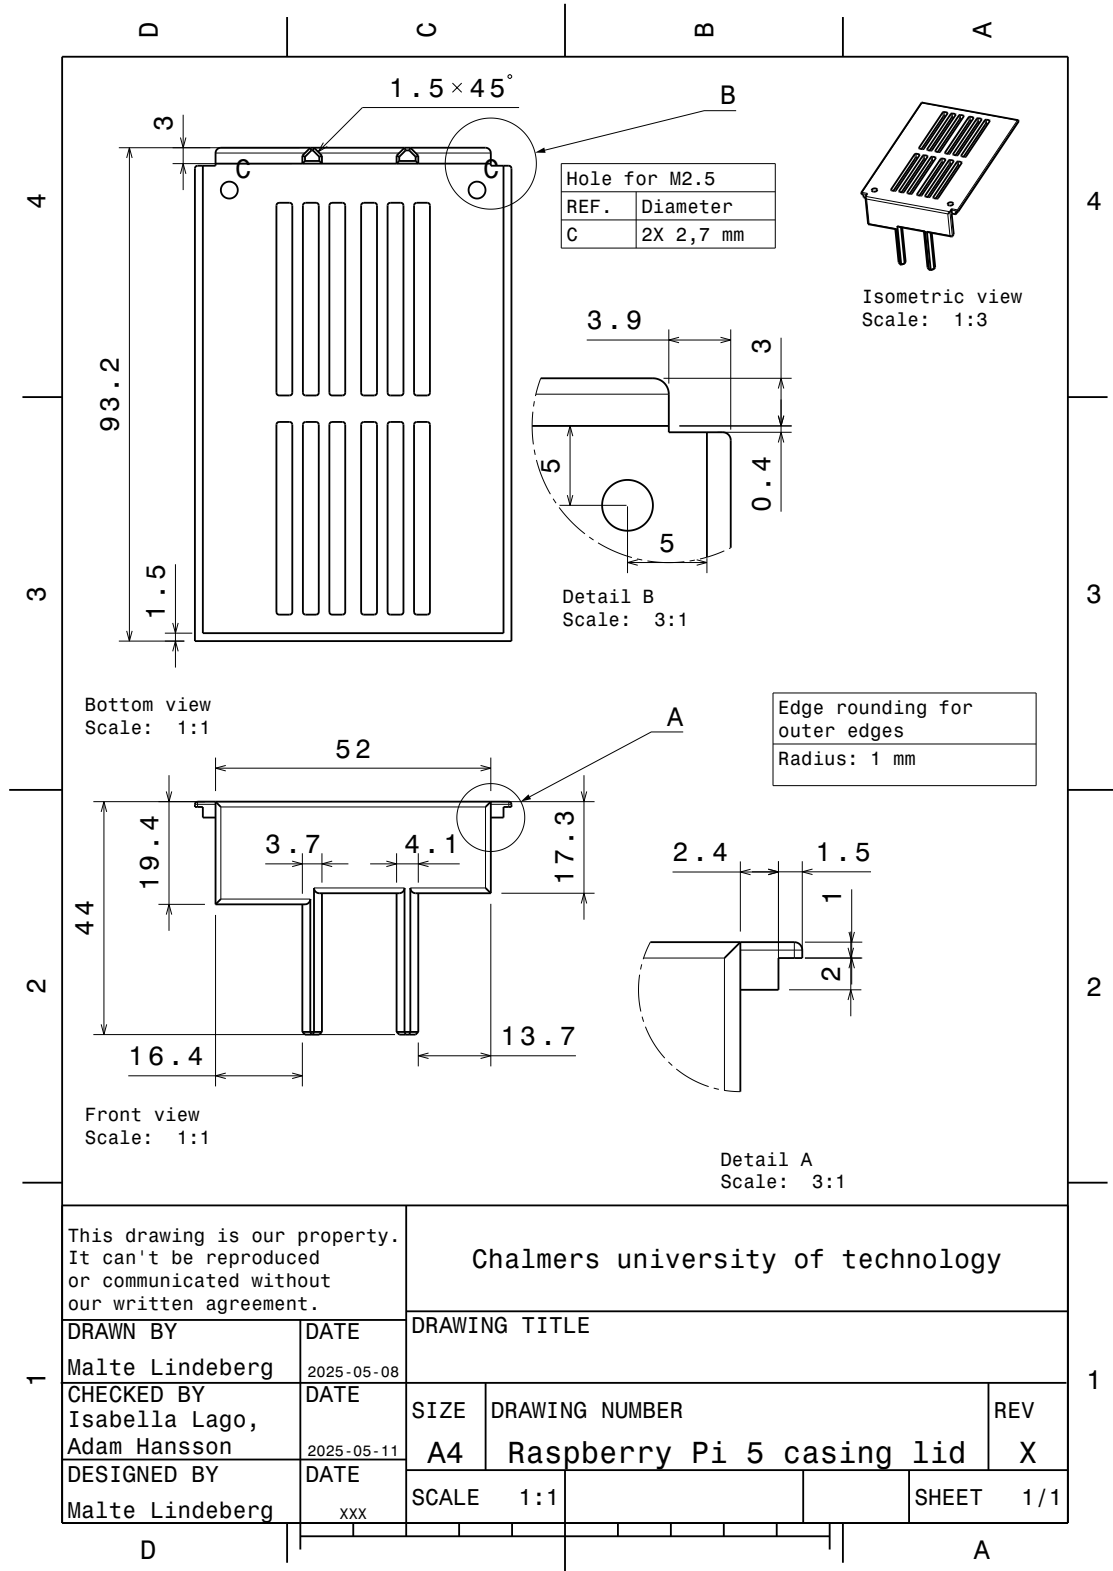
Raspberry Pi 5 casing lid CAD drawing.
